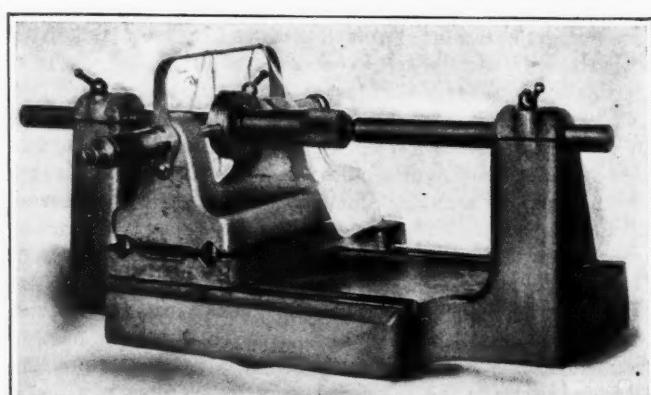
Screw Measuring Machine used by the National Physical Laboratory of England
